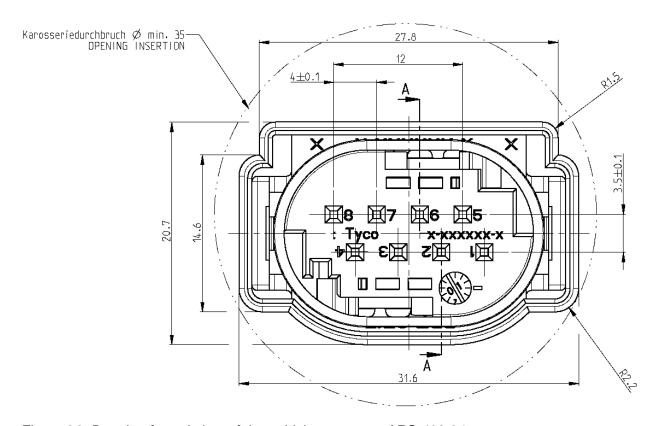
Drawing frontal view of the vehicle connector ARS 408-21
